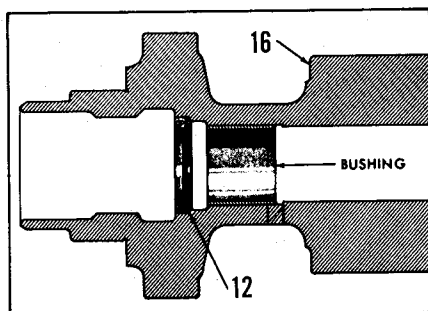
Cross-section of mainshaft (16) showing proper installation of pto shaft oil seal (12). Bushing is not available separately from mainshaft.
